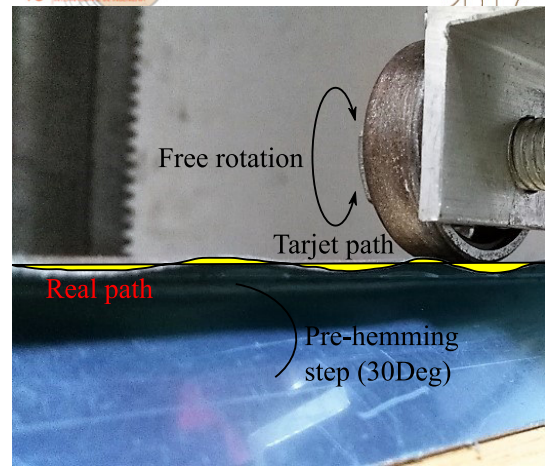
Roller in contact with the sample part on a pre-hemming step.
